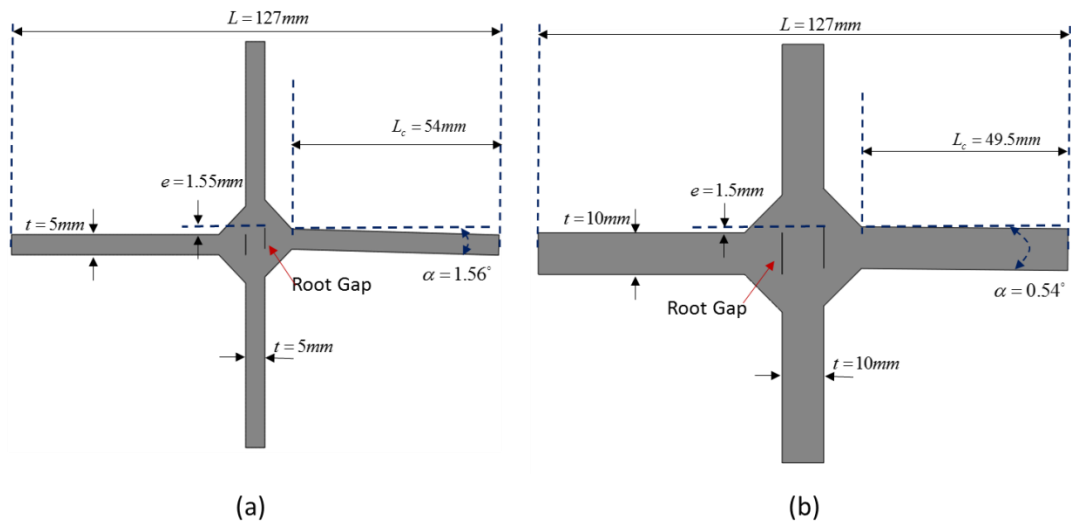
Illustration of dimensional relationships between actual test specimens and analytical model (see Figure 3.6 or Figure 3.8): (a) Specimen UM-A19; (b) Specimen UM-B13
